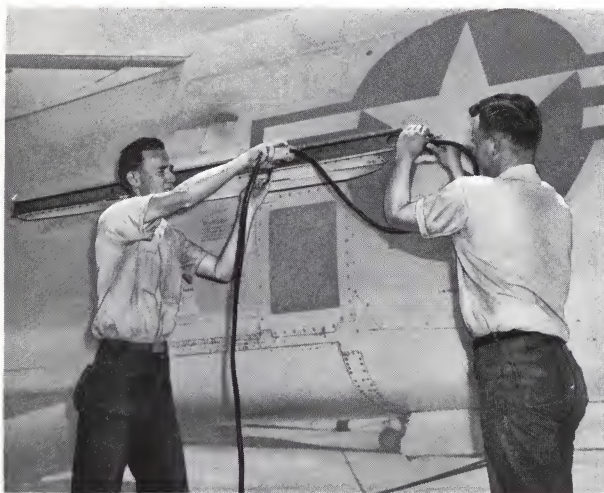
Lug Handle Inserted and Cable Assembly Connected.
